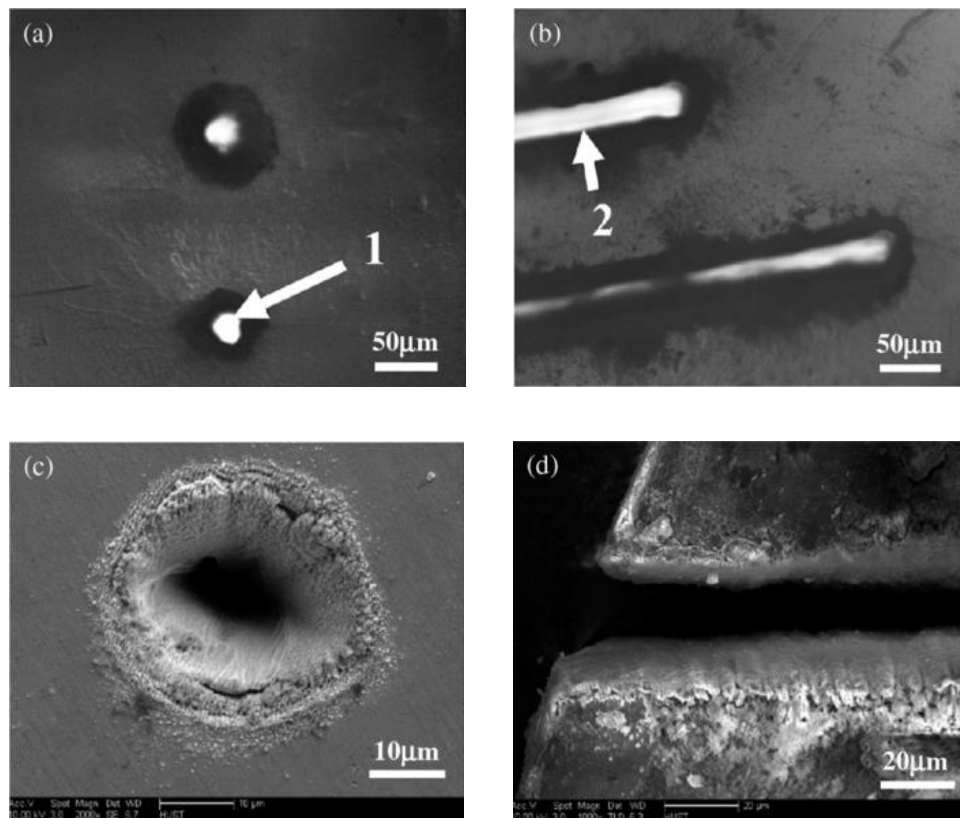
(a) SEM micrographs of the fs laser machined holes; (b) SEM micrographs of the fs laser machined trenches; (c) enlarged view of (a); (d) enlarged view of (b) (Wang et al., 2007).
